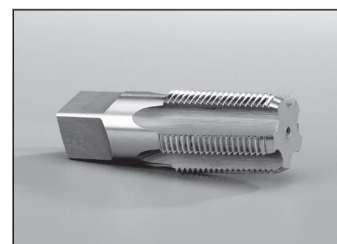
BSPT Taper Pipe Thread Tapping Tool
